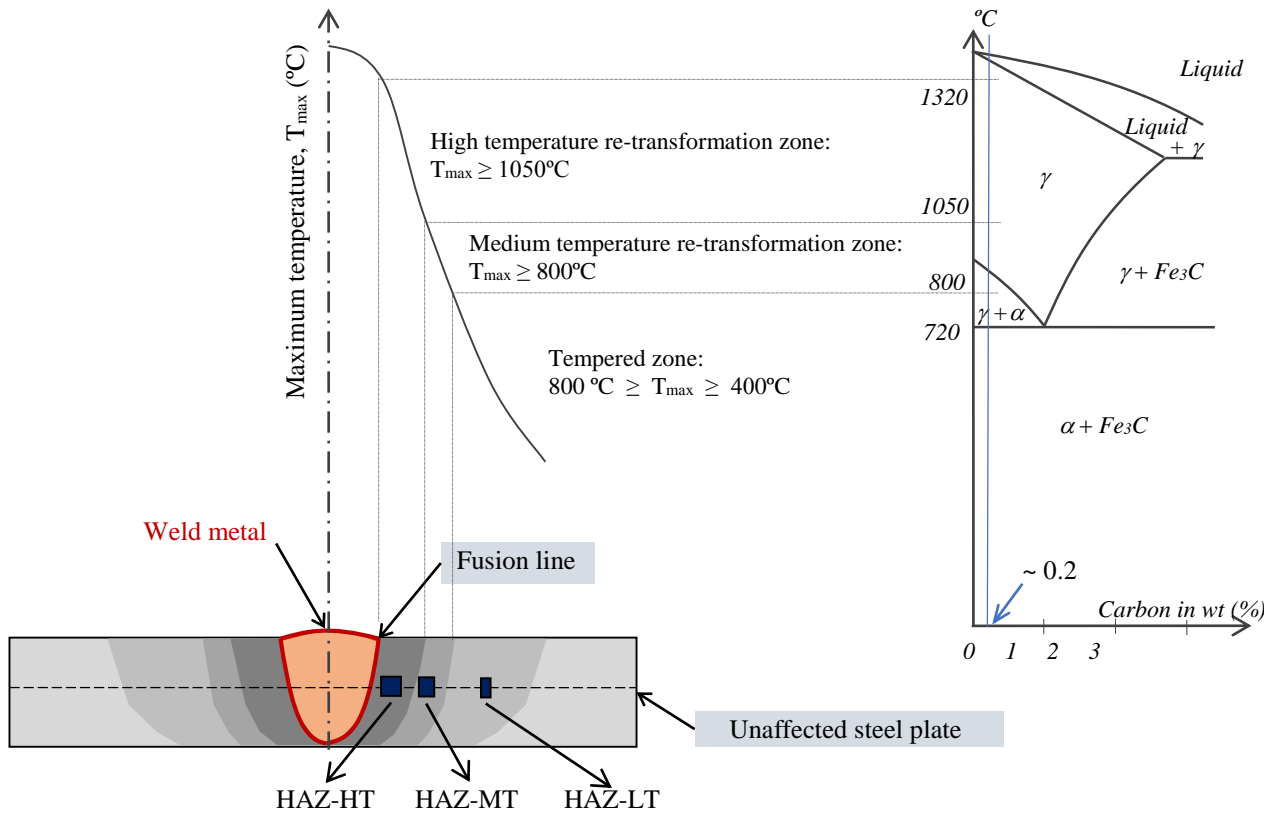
Heat-affected zones in S690 welded sections after a single pass welding
